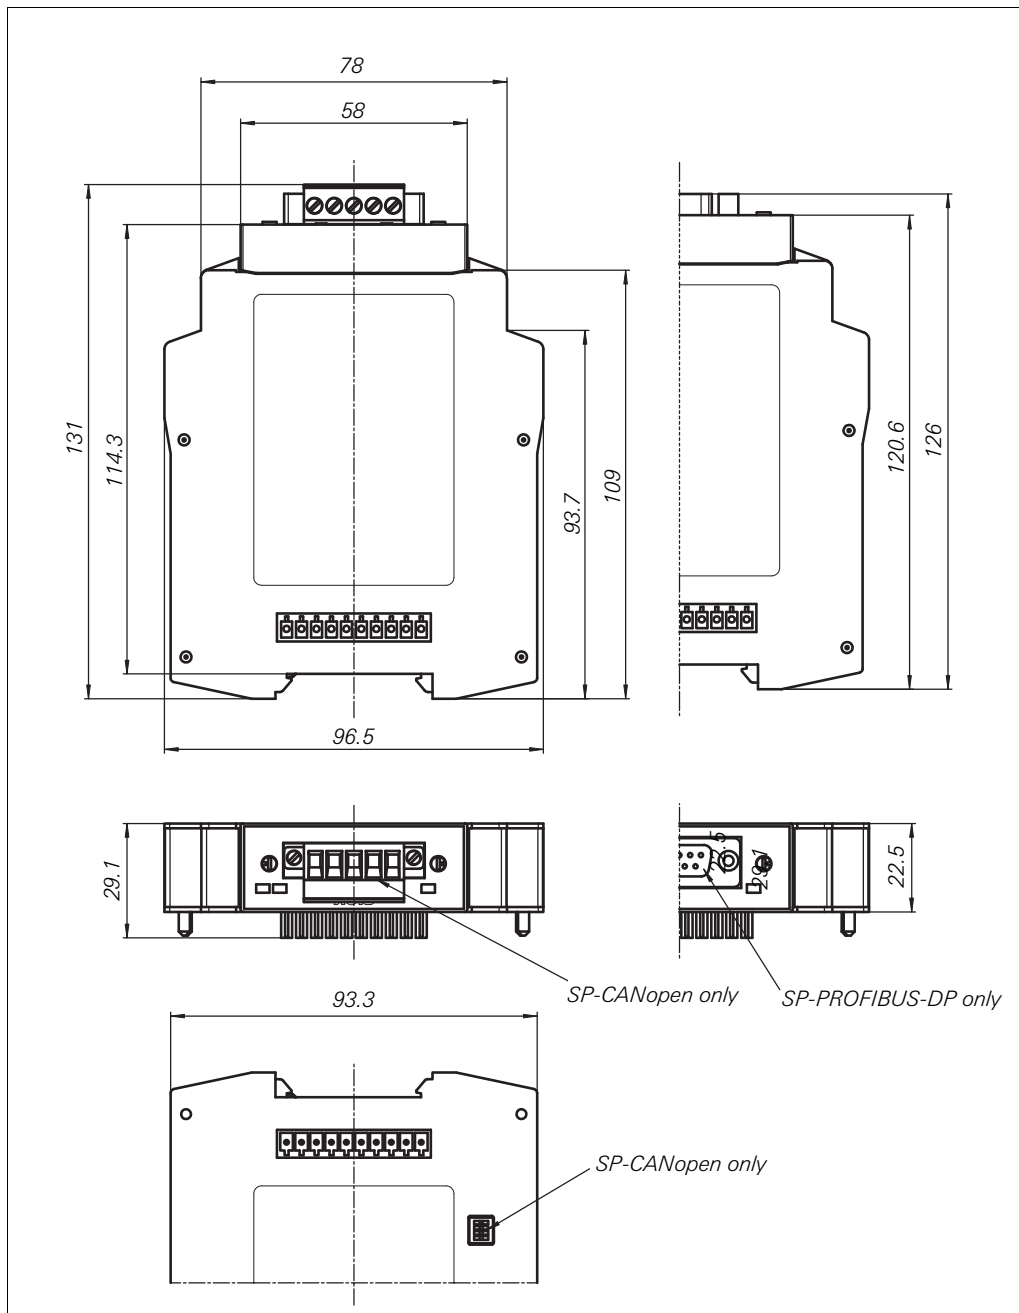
Dimensional drawing SP-CANopen and SP-PROFIBUS-DP (mm)
